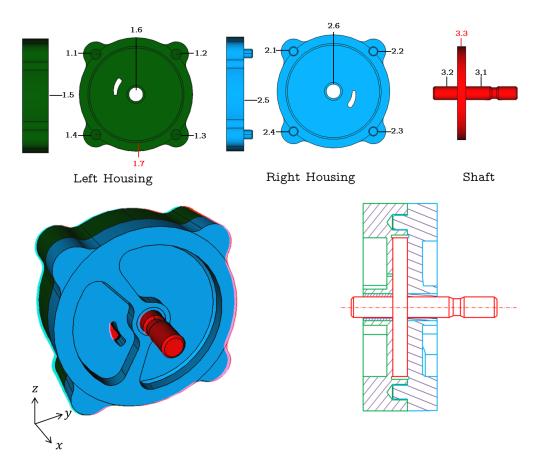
Pump: CAD model, enumeration of parts and surfaces(handle surfaces in red), and section view to illustrate the joints between the components
